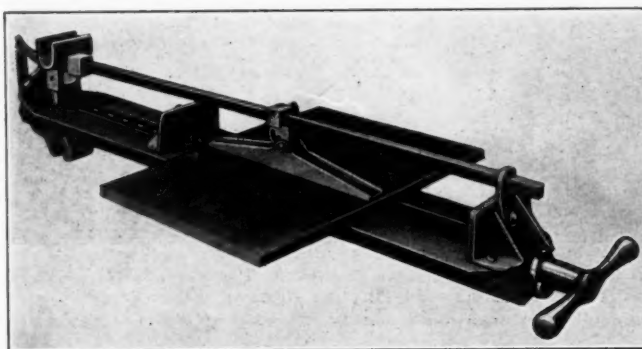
ONE TYPE OF CARRIER CLAMP SHOWING RUGGED CONSTRUCTION, WIDE CLAMP TABLE AND CLAMP JAWS, ALSO ADJUSTABLE HOLD-DOWN ATTACHMENT
